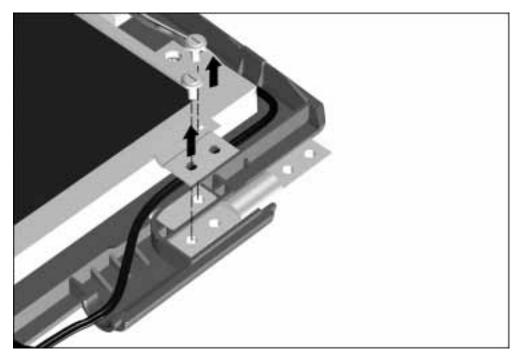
Removing the Clutch Screws and Retaining Plate
